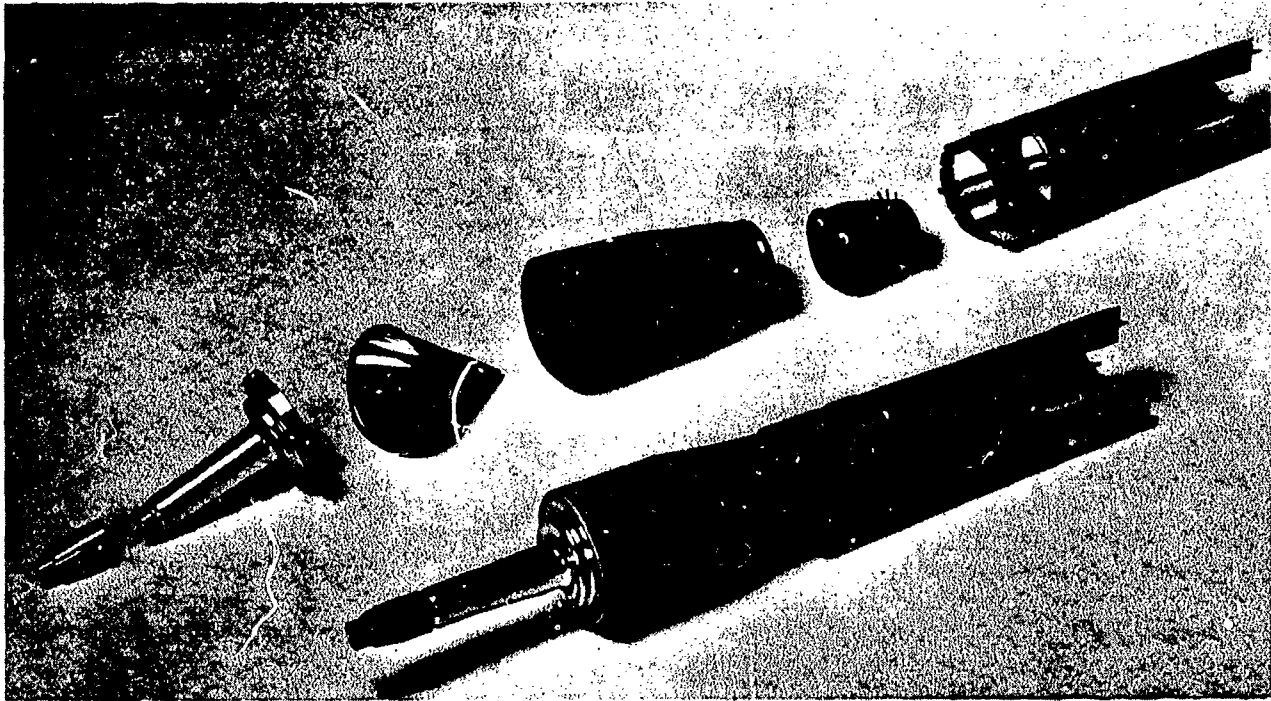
ROCKEYE II BOMBLET CONFIGURATION; DISASSEMBLED AND ASSEMBLED
